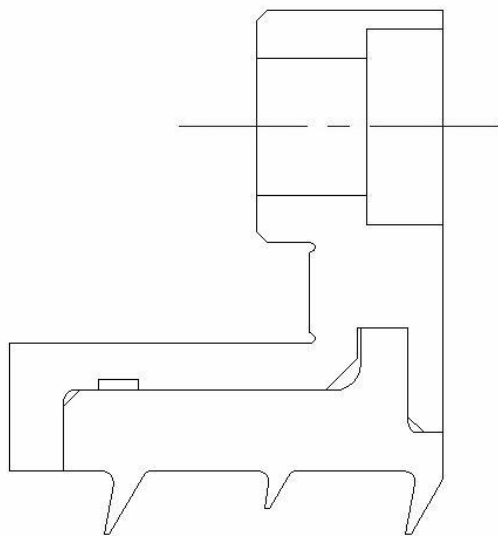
Drawing of Redesigned Eye Seal Consisting of Metallic Holder with TORLON® Labyrinth Insert.
